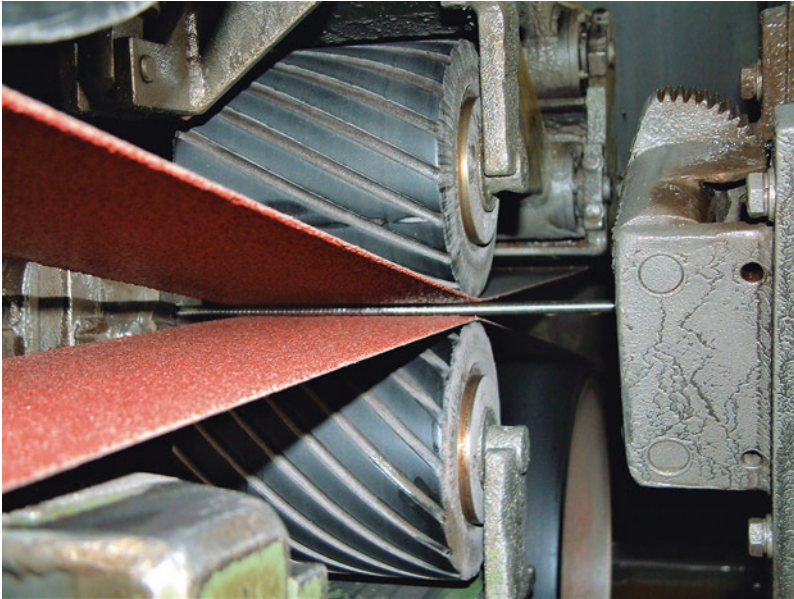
Centerless continuous working through-feed grinding machine in a grinding line for bar diameters of 5 to 10 mm. (Photo: Schlegel, J., BGH Edelstahl Lugau GmbH)
